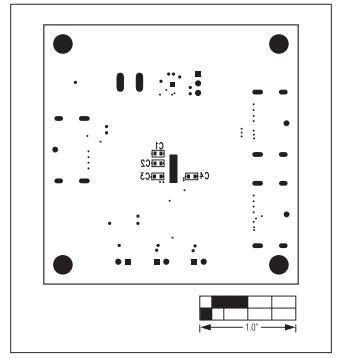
MAX14998 EV Kit Component Placement Guide— Solder Side
